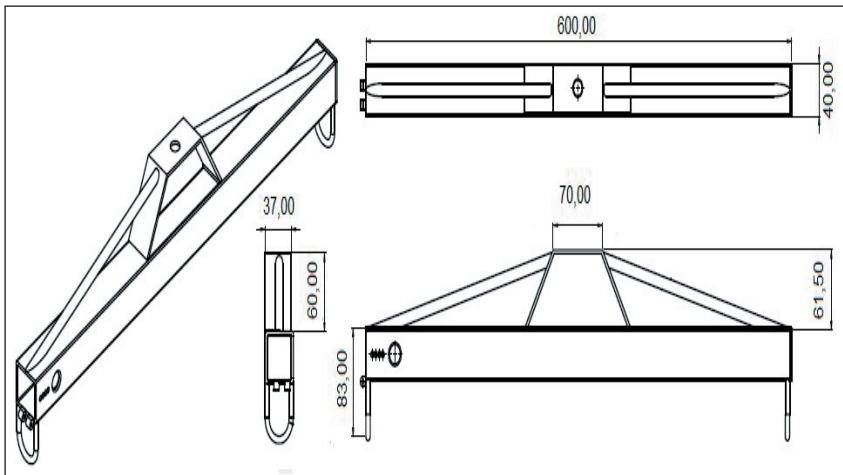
Representation of the most relevant dimensions of the swingletree (expressed in millimeters).
